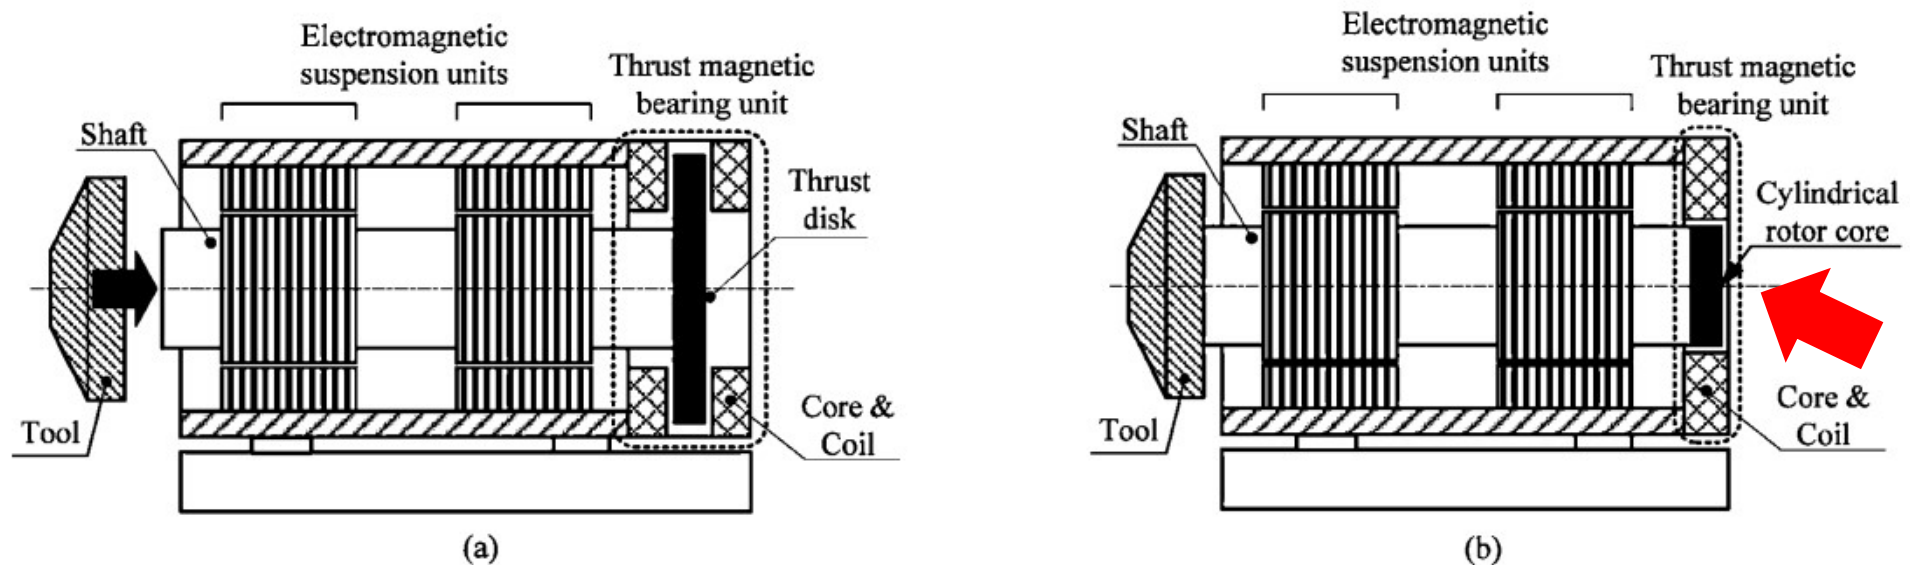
Magnetic levitation system with thrust magnetic bearing: (a) TMB with thrust disk; (b) TMB with cylindrical rotor core.
